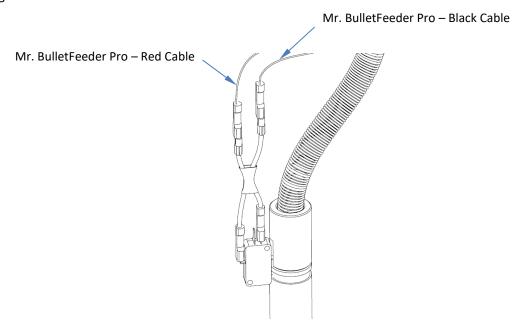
Filter-BulletFeeder Cable Assembly Installation
